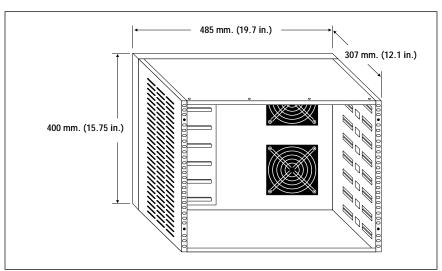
Seven- and Eight-Slot Desktop Chassis Dimensions
